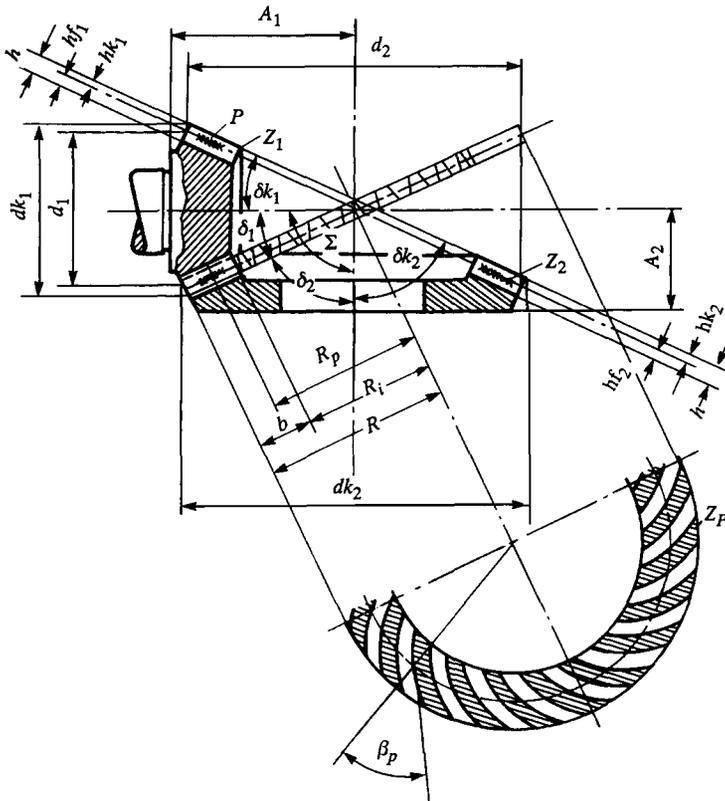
Oerlikon spiral bevel gear dimensional layout
